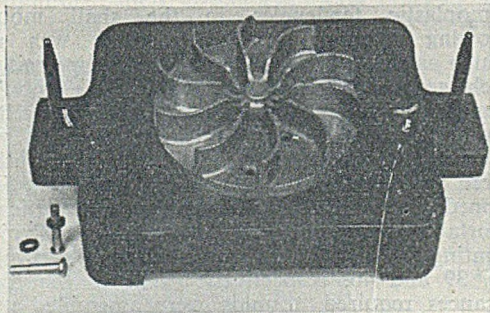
Impeller Patternplate, 10 by 12 in.
